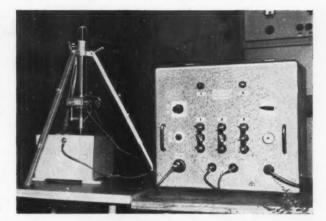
A Transportable Spark Erosion Unit of 1-kVA. Rating which can be Used on Both Large and Small Workpieces. The Stroke of the Electrode Spindle is 4 in.
